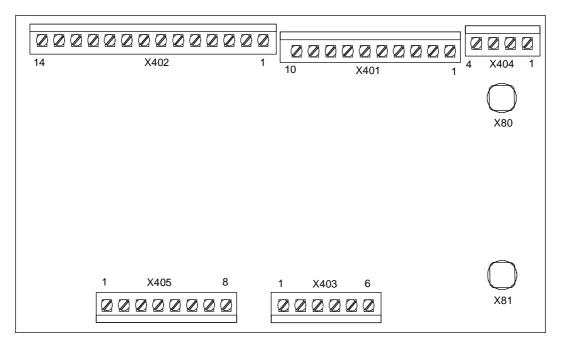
Terminal strip assignment on the DTI board 6SE7090-0XX84-3DB1
